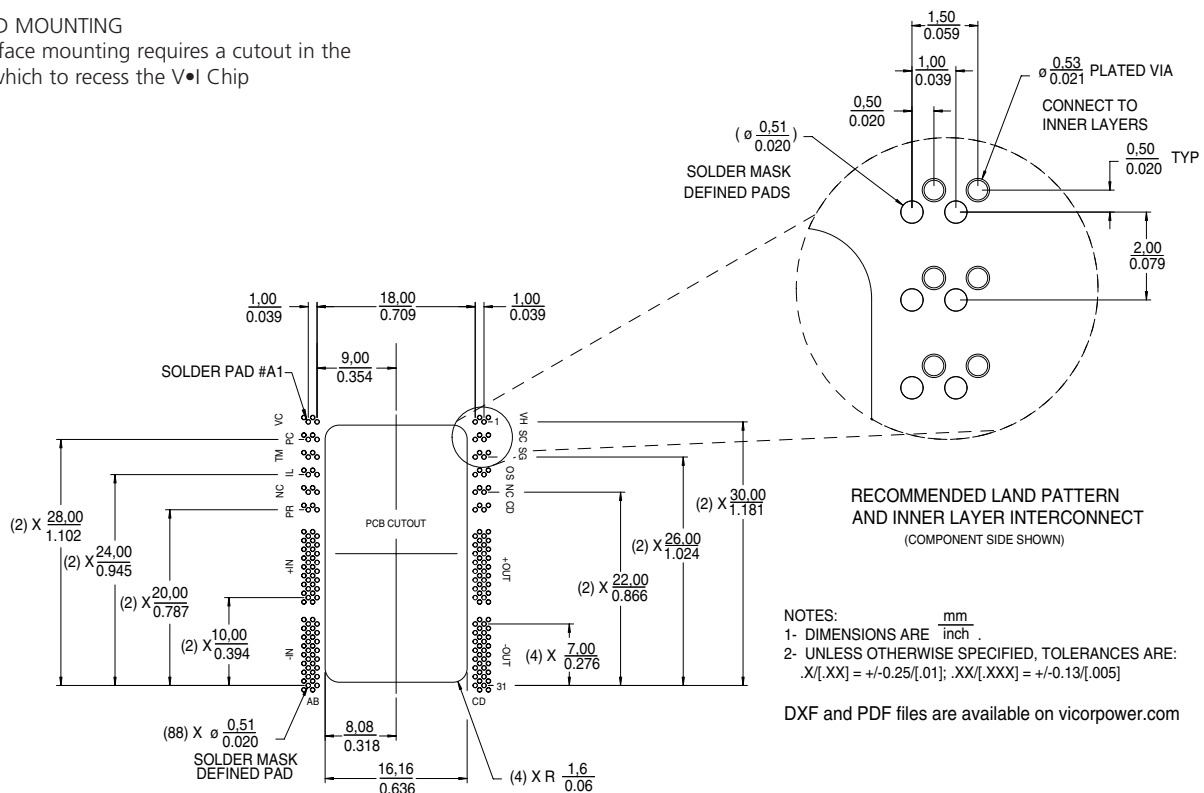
PRM BGA PCB land / VIA layout information; Inboard mounting
